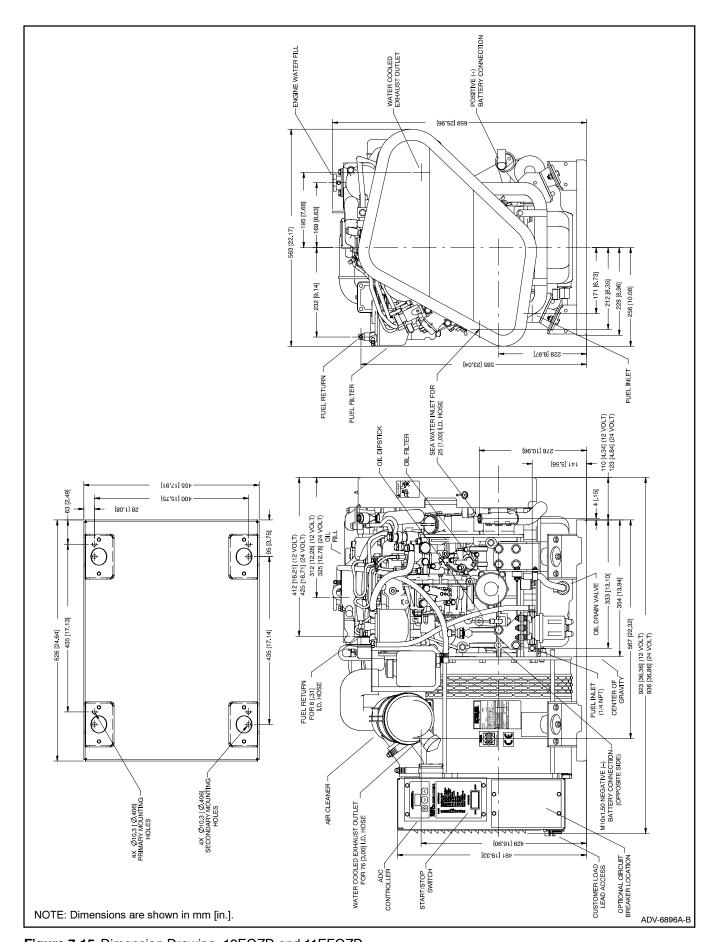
Dimension Drawing, 13EOZD and 11EFOZD
